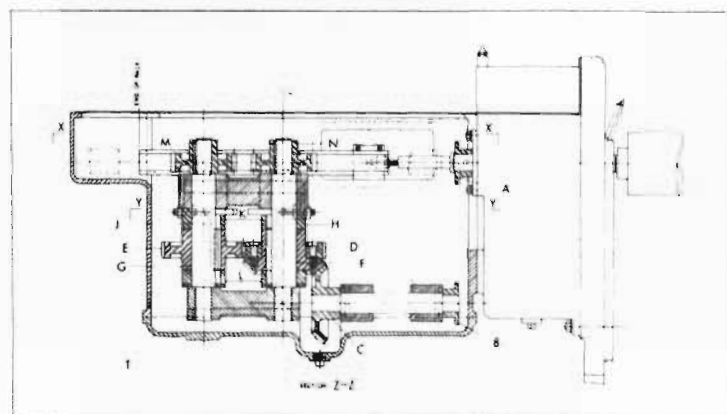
View of thread-guide traversing mechanism shows design of the pinion-clutching arrangement on shafts *H* and *J*.
